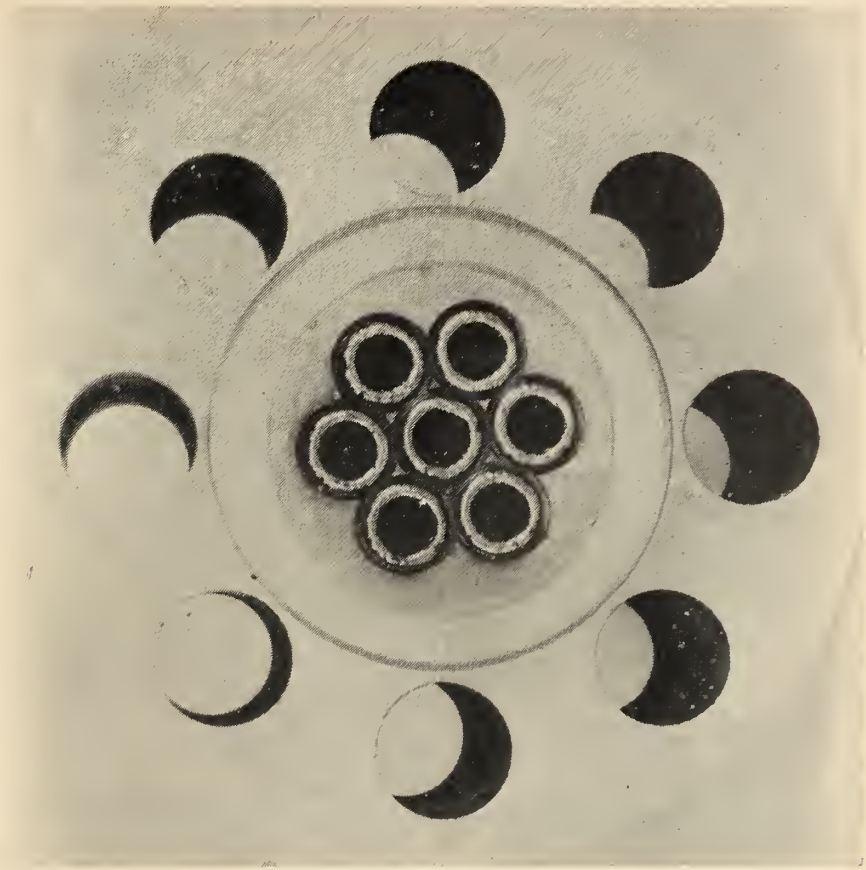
Cupro-nickel to mild-steel welds. Completed welds, on pressure test sample.
